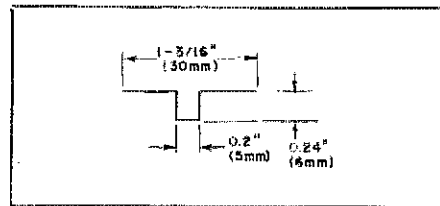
Dimensions for L6. The material is no. 24 copper wire. If possible it should be silver plated.
